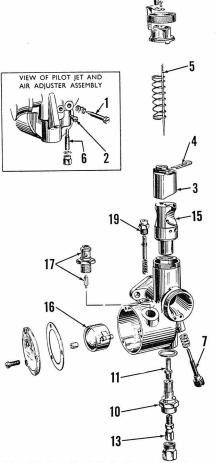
Exploded view of carburetor typical of type used on D7 model.
